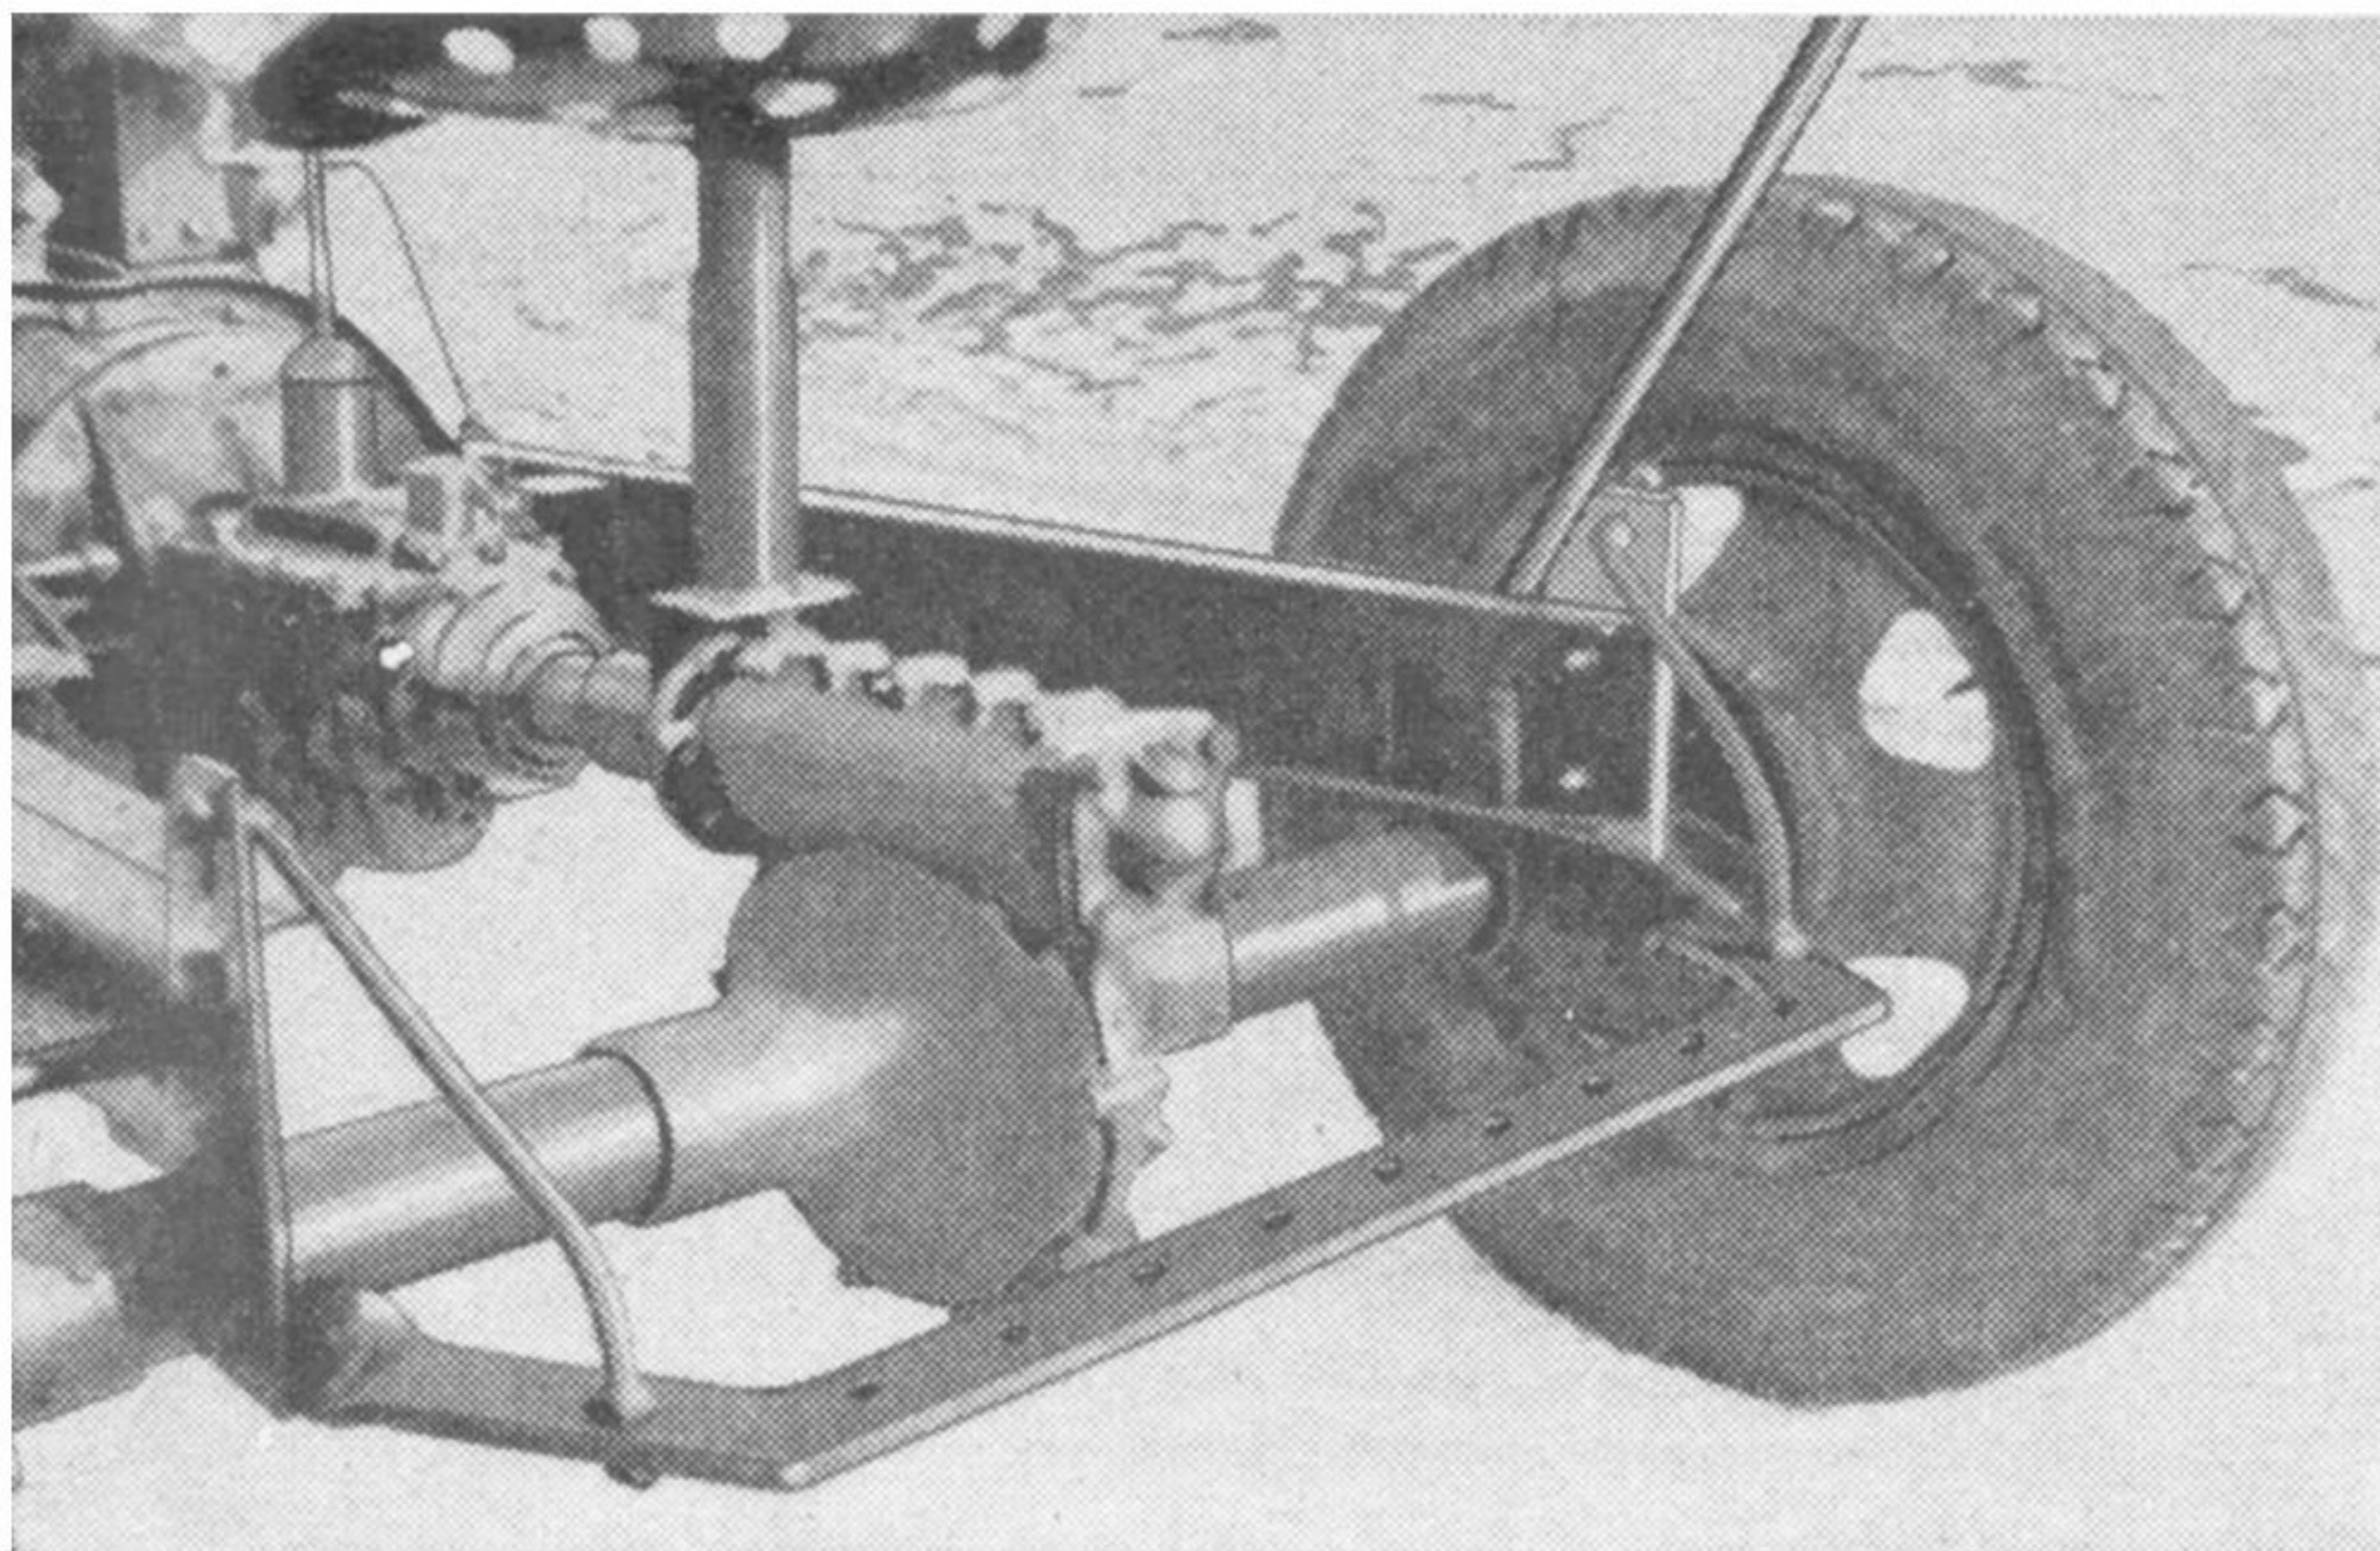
A. Close-up of rear end with drawbar attached, showing pipes and bolts in place to maintain axle alignment; also pipe for brake handle.
